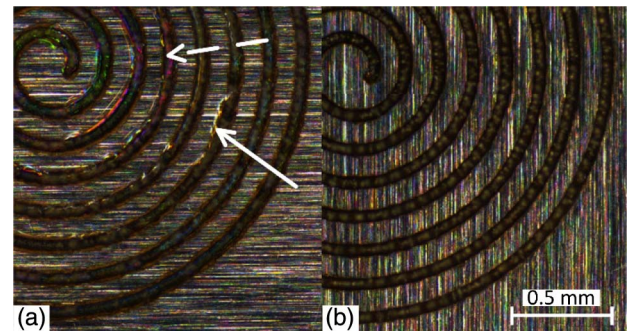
Example micrographs of Al6082- SiO_2 : (a) poor weld with delamination (colored interference within the welds, dashed arrow) and macro cracking (between welds—solid arrow), and (b) a good weld.
